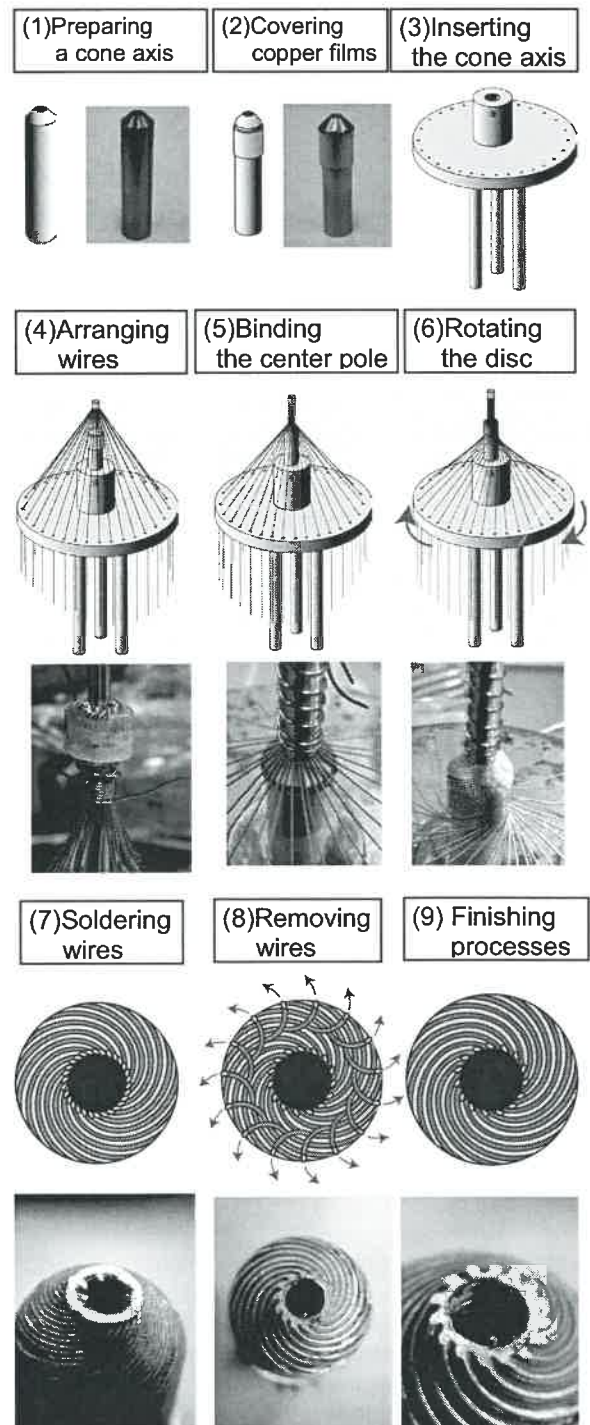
Making process of the micro spiral bevel gear utilized extra fine metallic wires.
